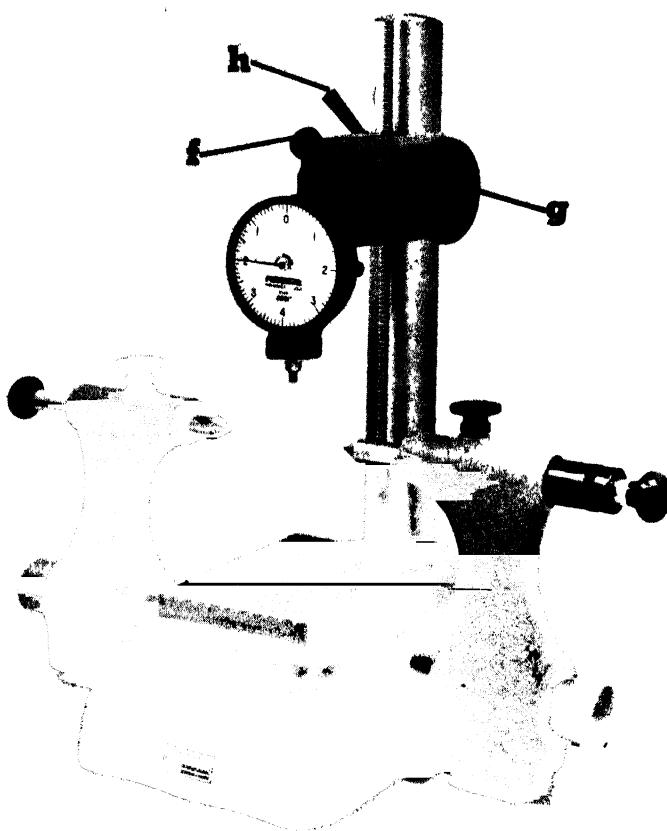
Commercial comparator gage equipped with accessories to simplify setting and operation.
